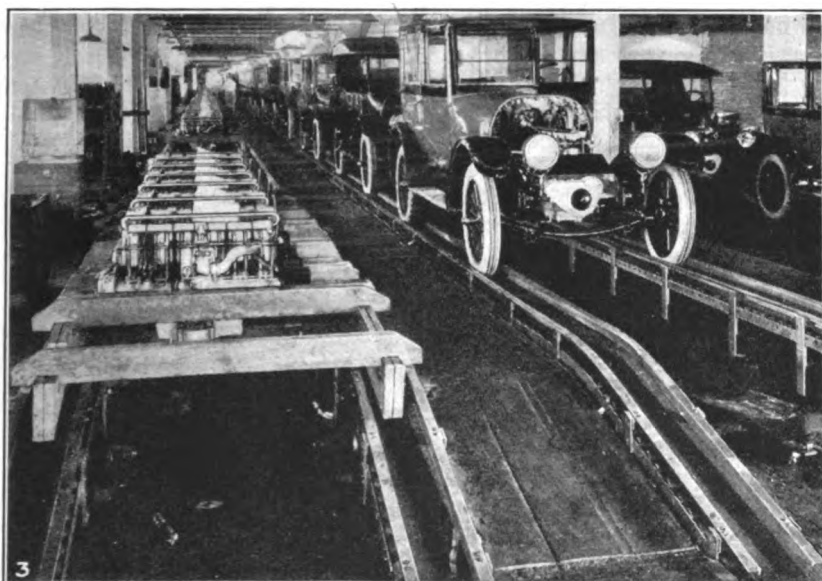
ELEVATED ASSEMBLING TRACKS. FIG. 4—REO SPEED WAGON ASSEMBLY
